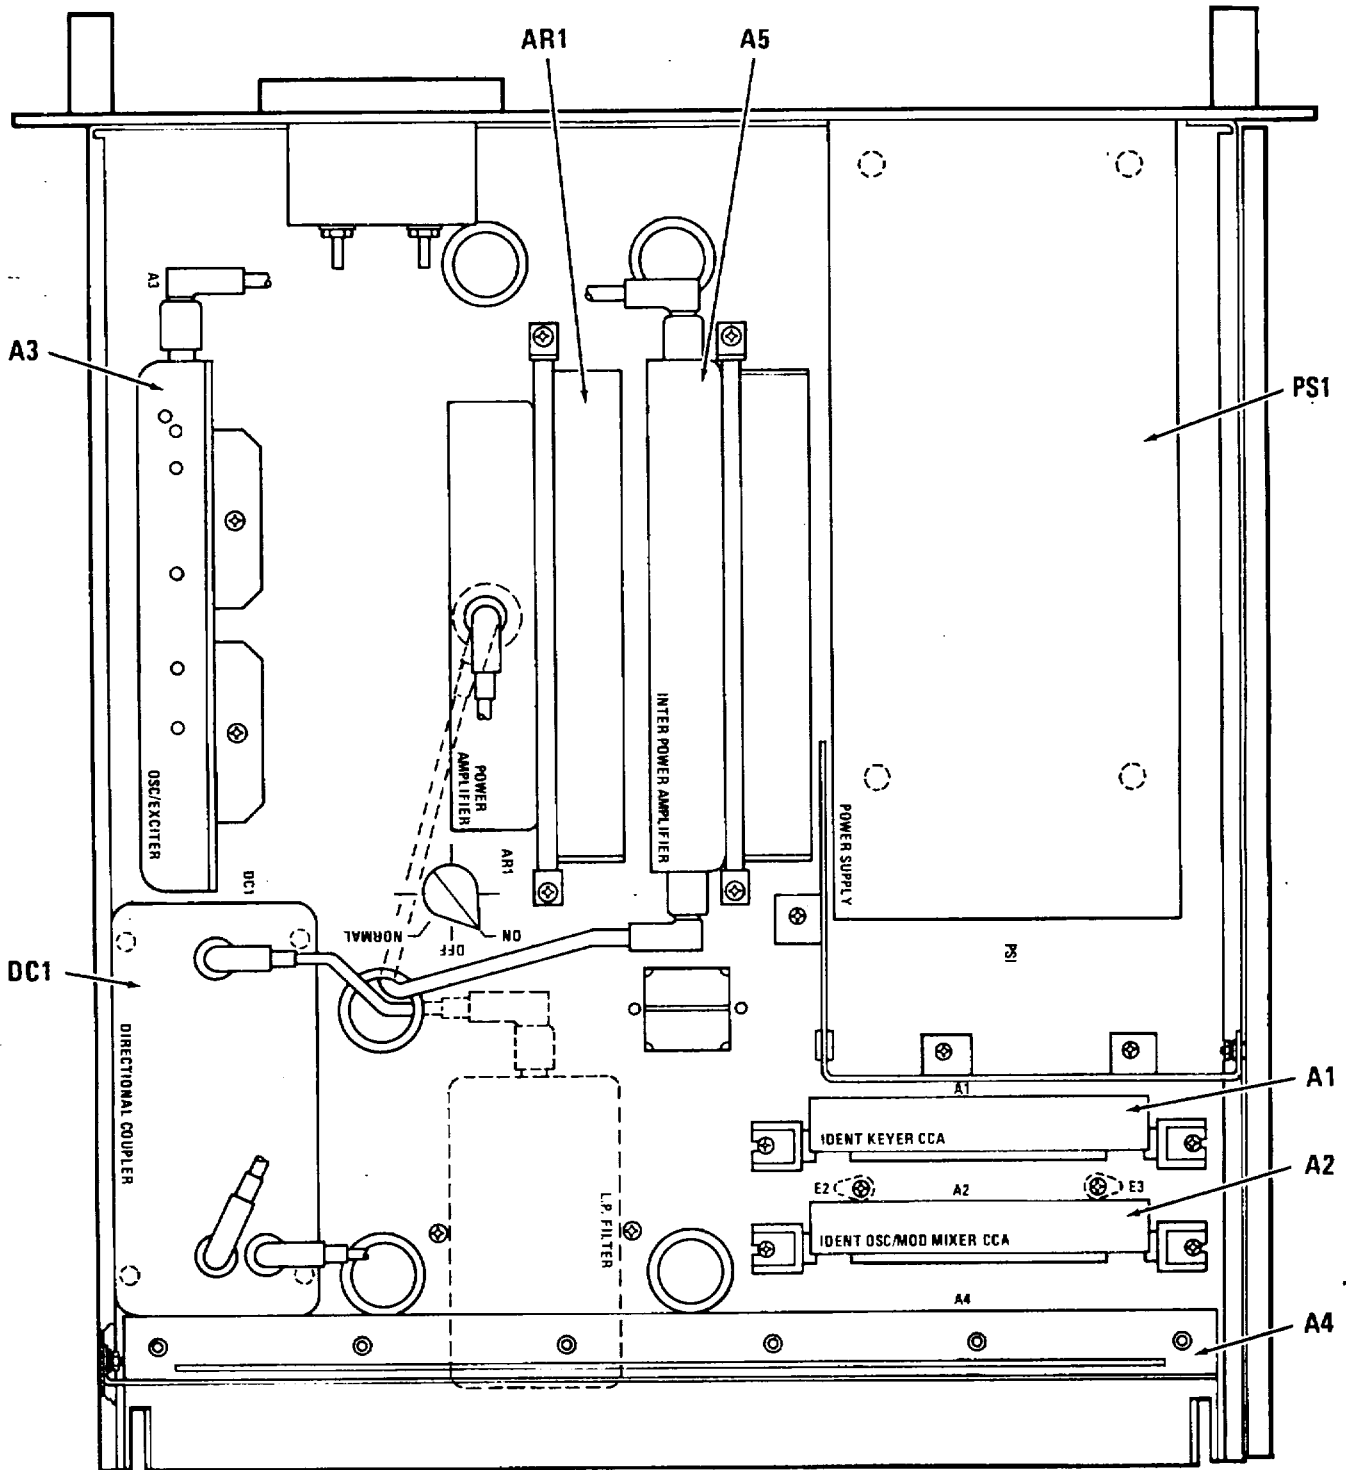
Radio Transmitter Front Panel and Chassis-Mounted Parts Location Diagram (Sheet 1 of 3)
